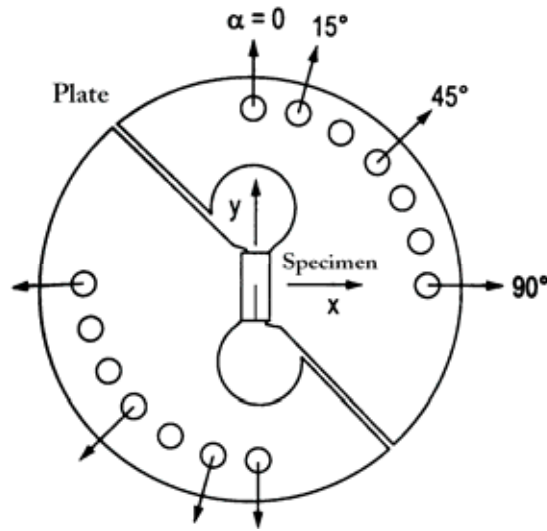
Universal ARCAN fixture allows acquiring different crack loading modes [7]
